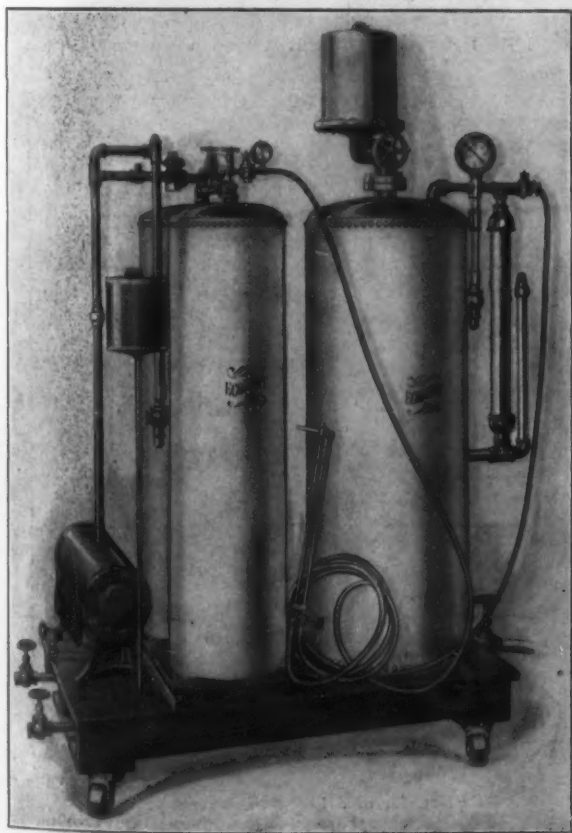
A New Portable Welding Machine Built by the Economy Welding Machine Company, Kansas City, Mo.
